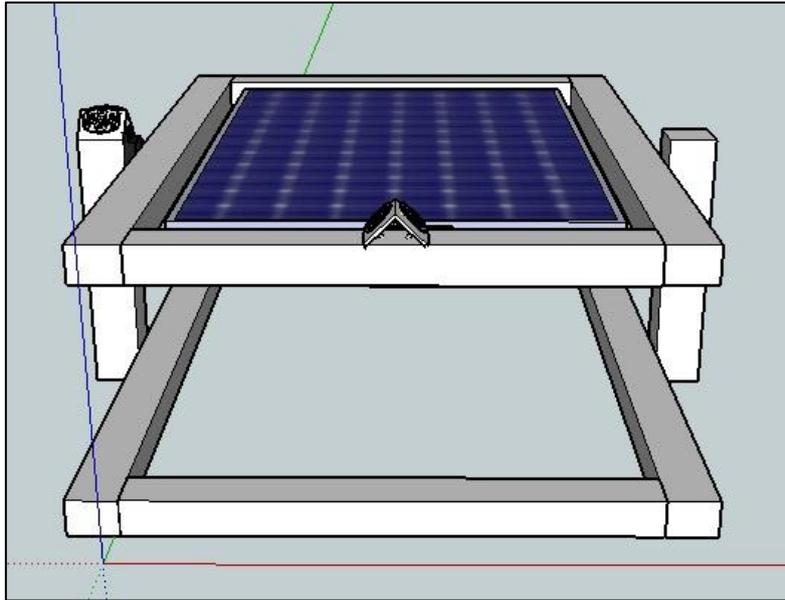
Dual Axis Solar Panel 3D drawing from right side
